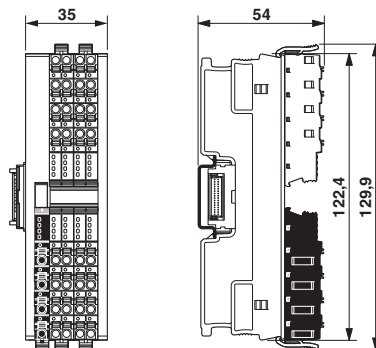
Nominal dimensions of the H housing with two terminal fields (type 2H, e.g., AXL F DI16/1 DO16/1 2H)
